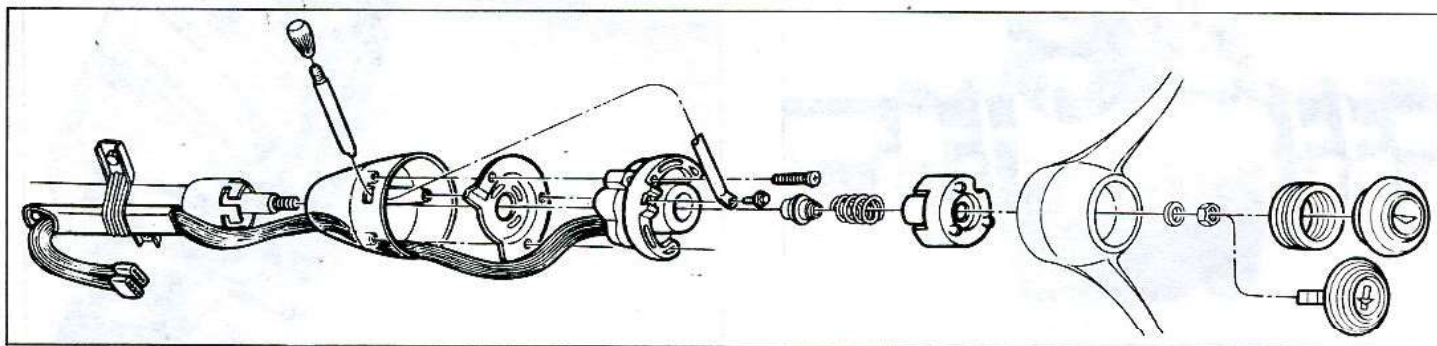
Exploded View of Mast Jacket and Steering Wheel
